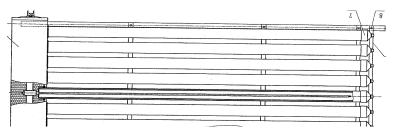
Cut drawing of the collector TZ 58/1800 10R
